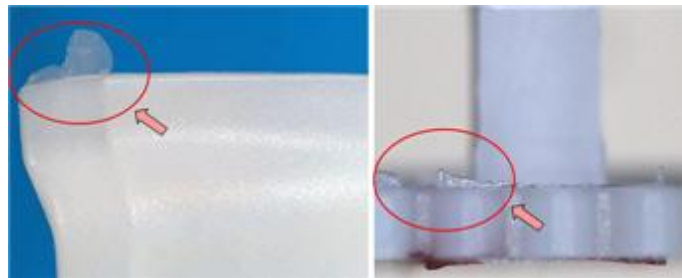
Examples of flash defects found when using injection molding. (Paulson, 2012)
